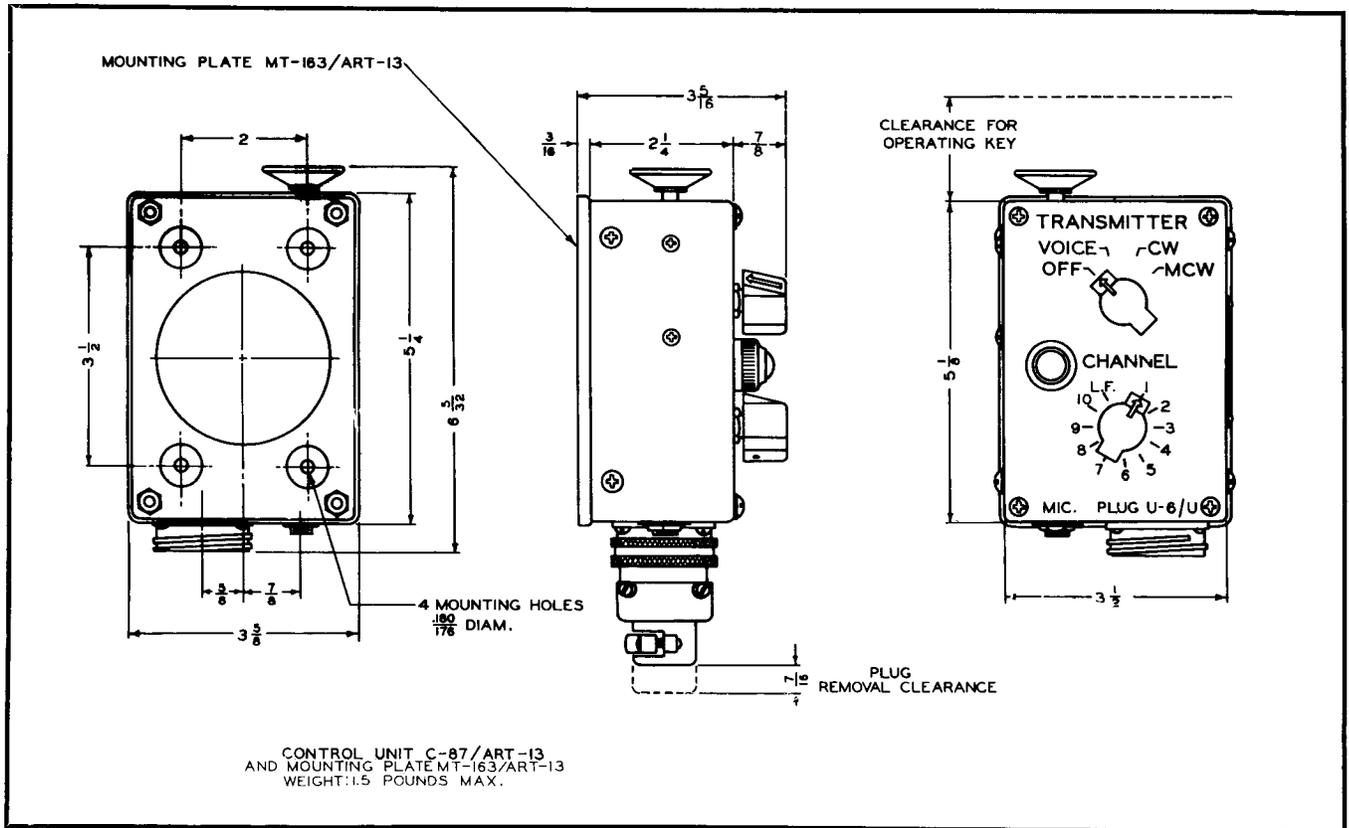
Control Unit C-87/ART-13 (Navy Type -23330)—Outline Dimensions
